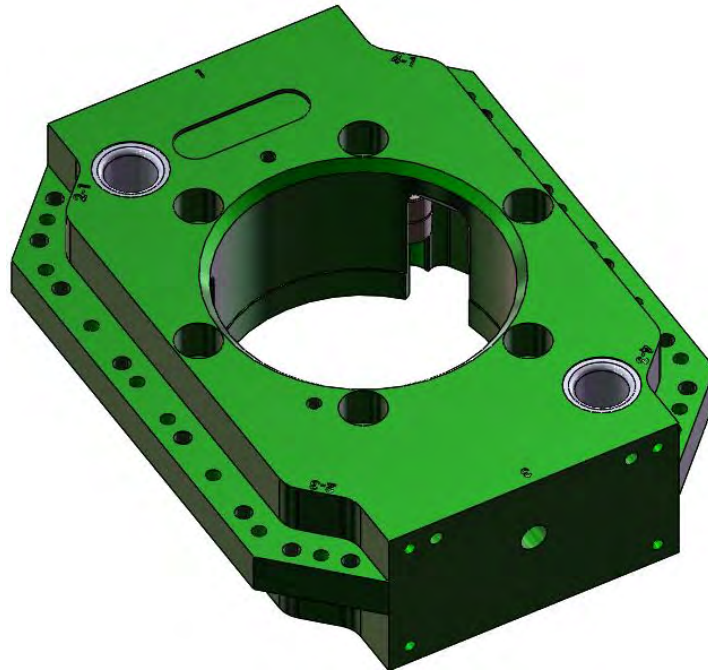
E125 Tool Adaptor Visual Inspection
